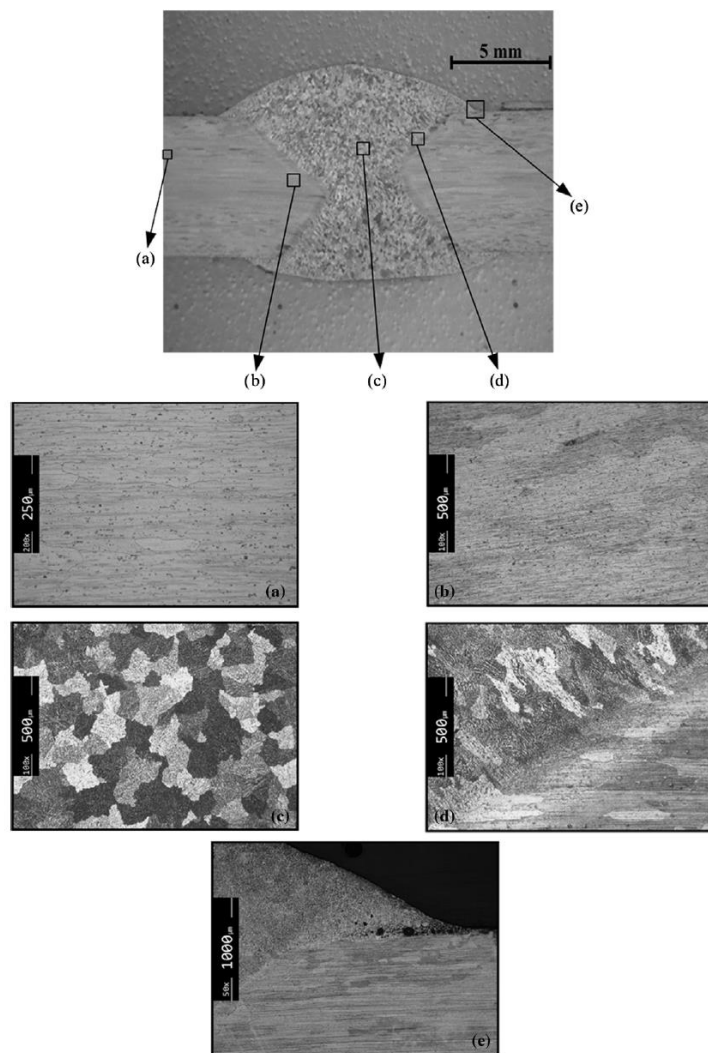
Metallographic analysis of MIG welds, (a) base material (BM), (b) heat affected zone (HAZ), (c) melted zone (FZ), (d) fusion line (FL), and (e) toe of weld (TW).
